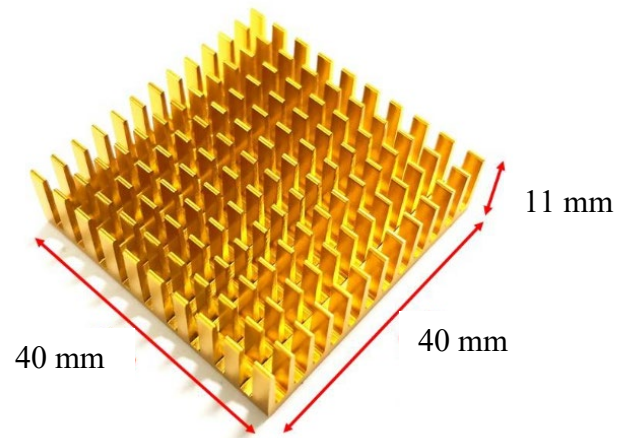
Aluminium Heat Sink With 11 mm Fins.
